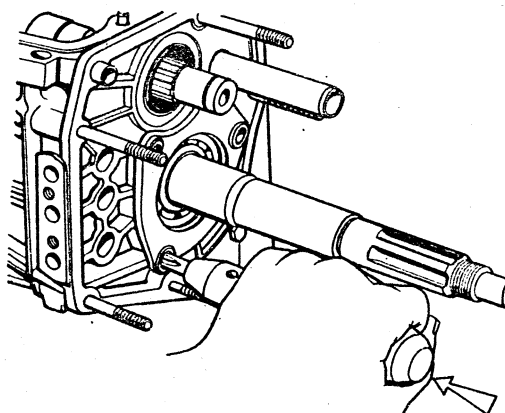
Removing the Fastening Screws of Main Shaft Intermediate Bearing Locking Plate with Power Screwdriver. Arrow shows direction of impact stroke after striking the screwdriver with a hammer
